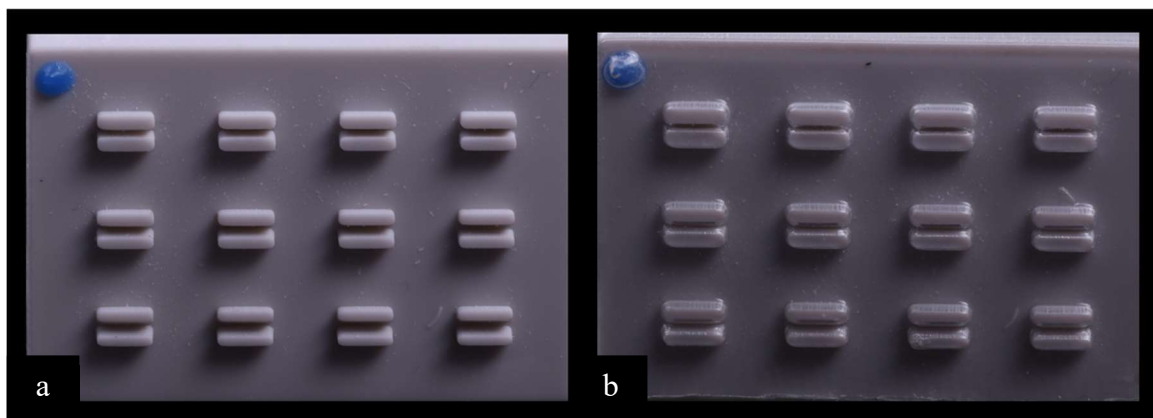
a) 3D printed resin model b) Model with vacuum-formed Zendura Flex
